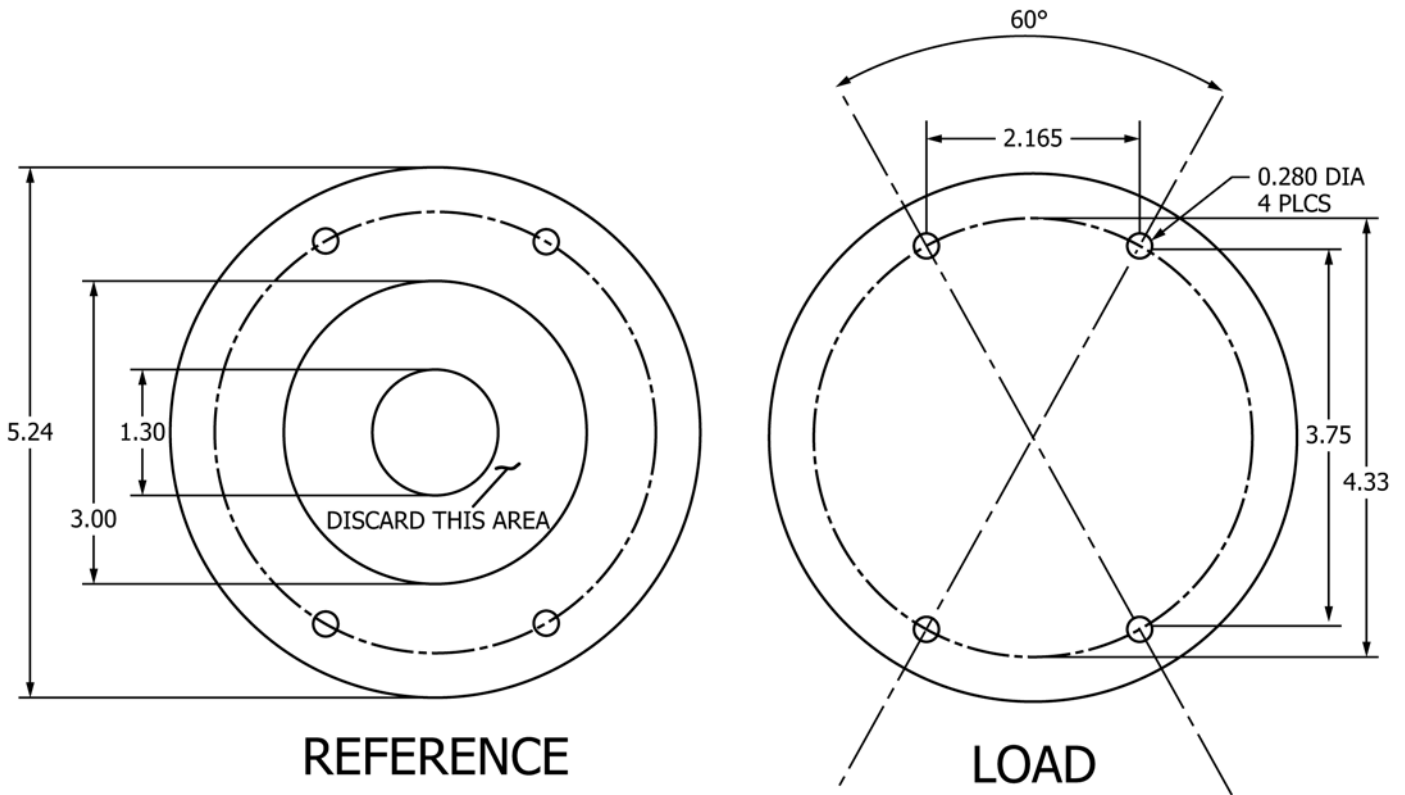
Drawing That Gives Dimensions of Reference and Load Specimens
